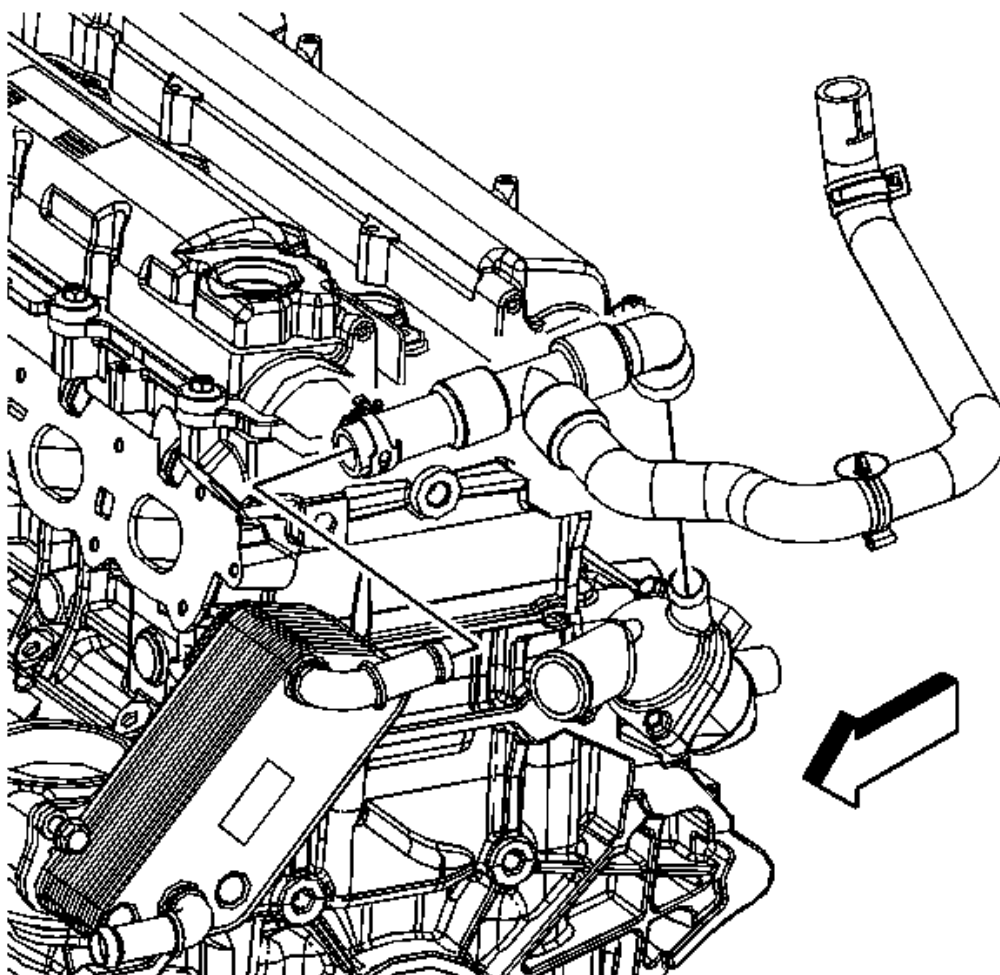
Identifying Thermostat Housing & Oil Cooler
